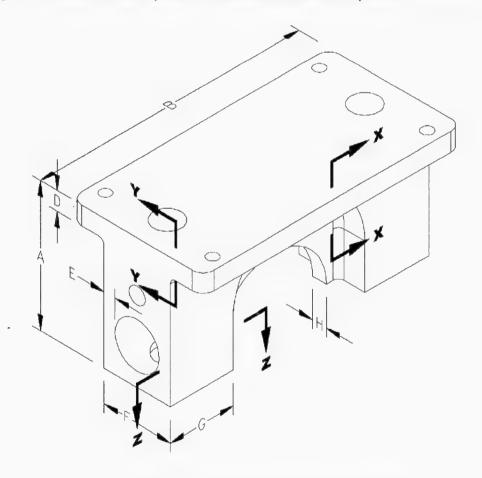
Key Dimensions of Forward Fitting (Cross-sections shown in Figure 8.2)
